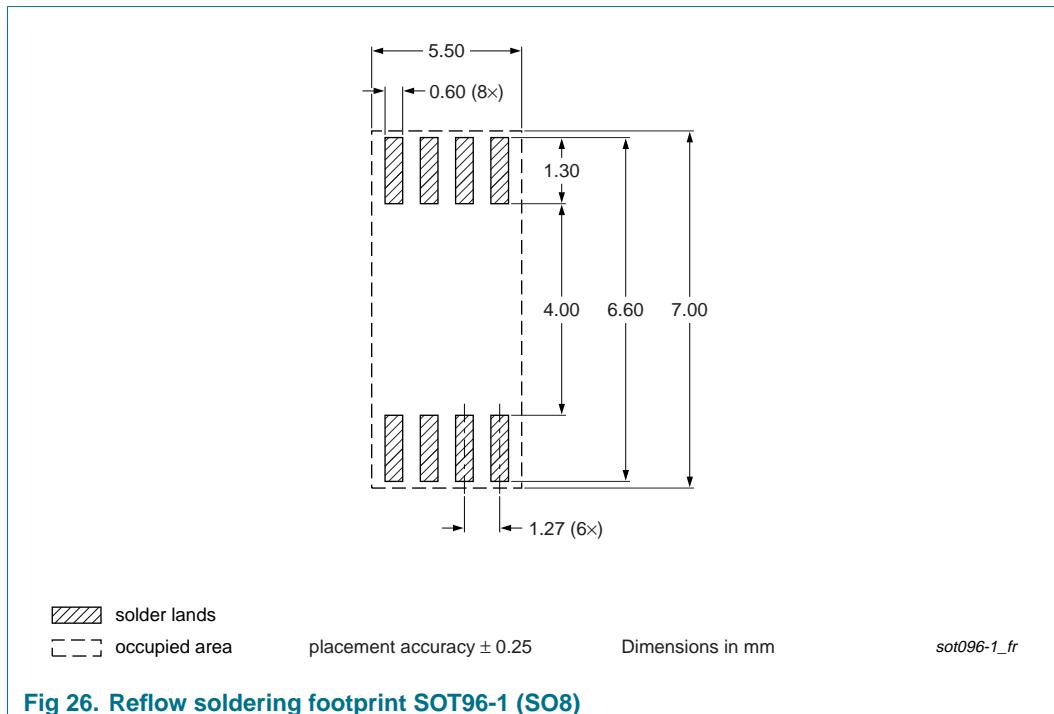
Reflow soldering footprint SOT96-1 (SO8)
